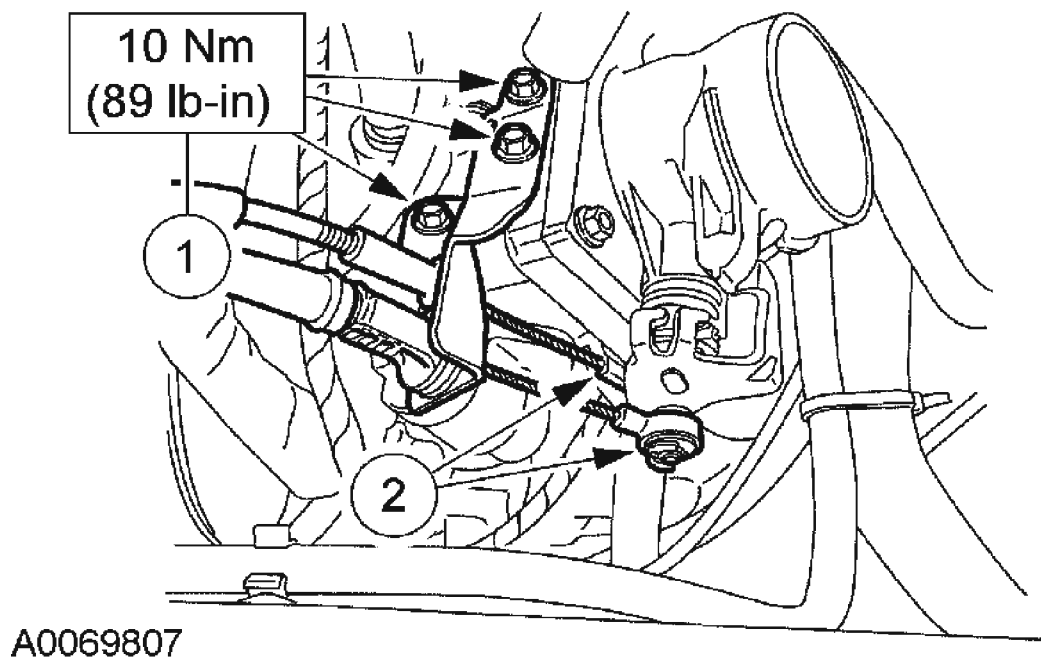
Connecting Accelerator Cable And Speed Control Cable To Throttle Body
